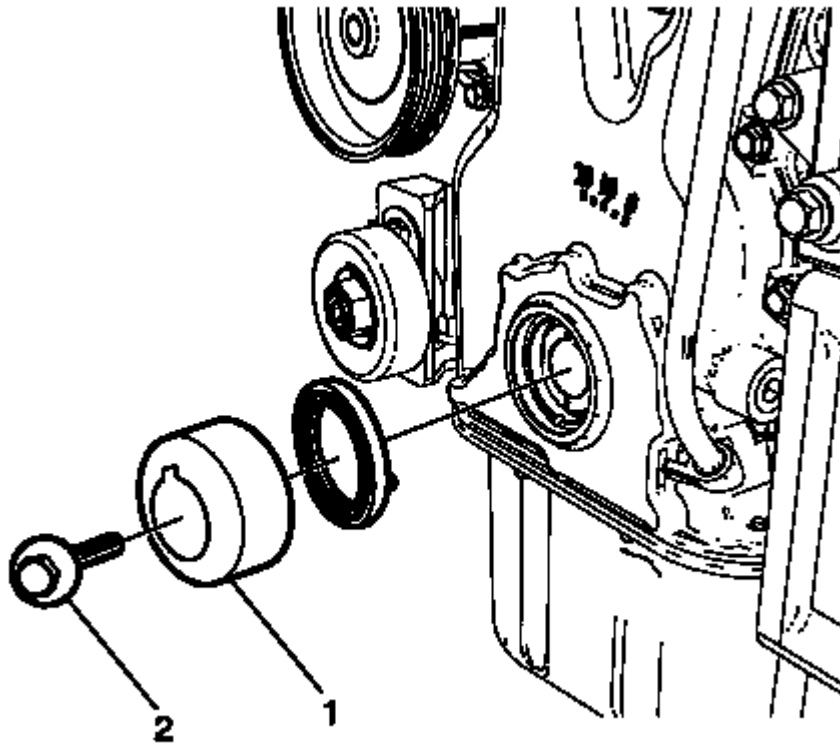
Crankshaft Bolt And Crankshaft Front Oil Seal Installer
